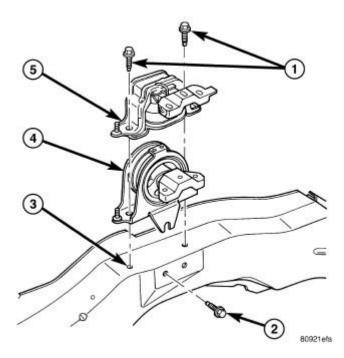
Engine Hydro-type Mount - Right Side Courtesy of CHRYSLER LLC
